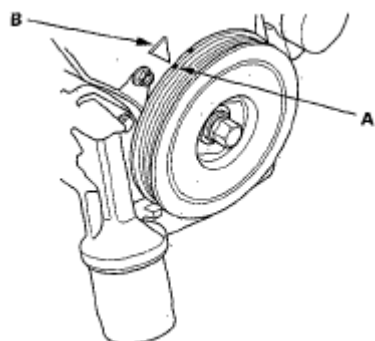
Identifying Timing Mark On Crankshaft Pulley
